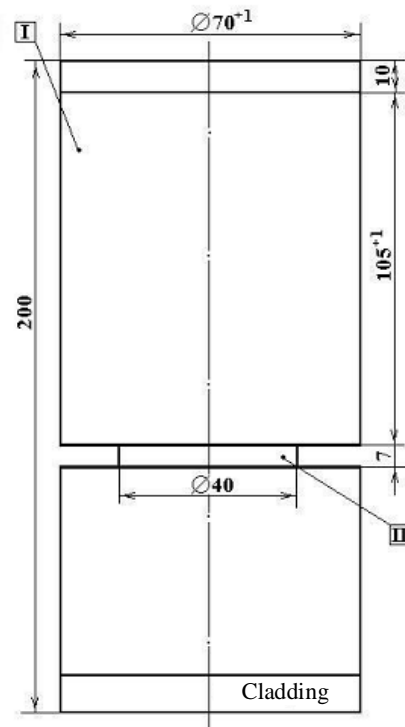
Blank No.V cutting plan for producing the tested specimen (I) and the reference specimen (II)
